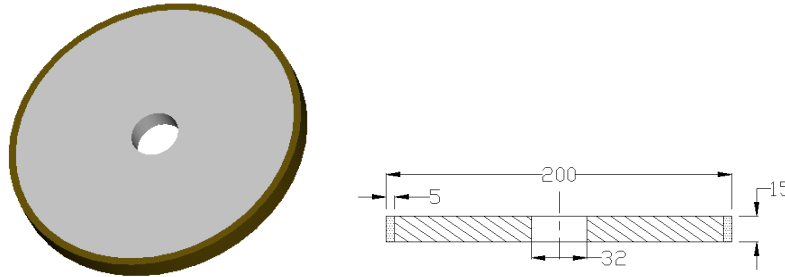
Schematic of the resin-bonded CBN wheel prototype and dimensions (1A1/T2, mm)
